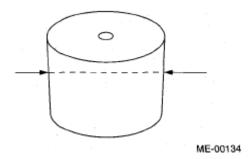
Checking Outer Diameter Of Valve Lifter Courtesy of SUBARU OF AMERICA, INC.
